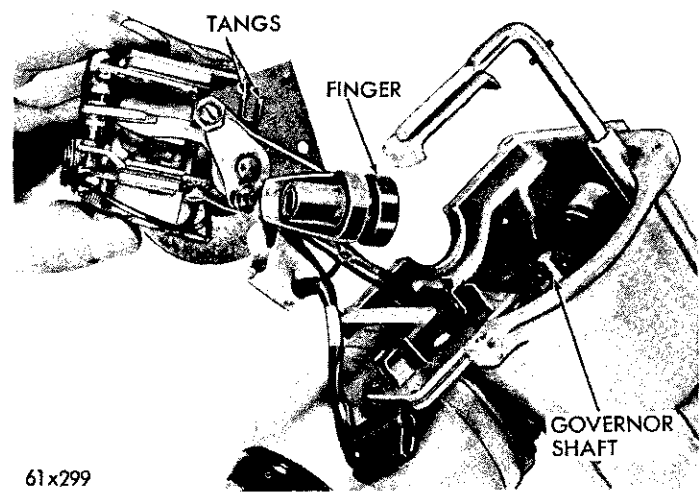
Installing the Complete Pintle Assembly in the Housing
